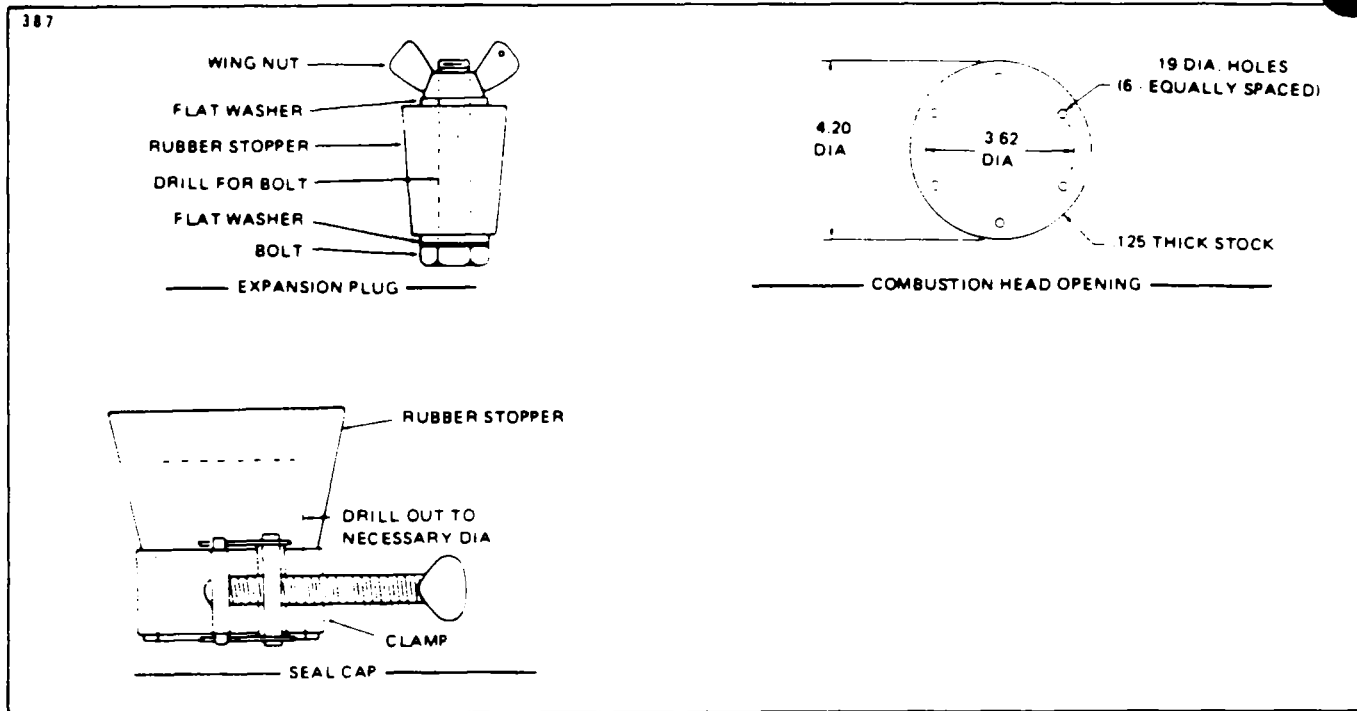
Suggested Design for Seal Plate, Plugs and Caps for Combustion Tube Leakage Test
